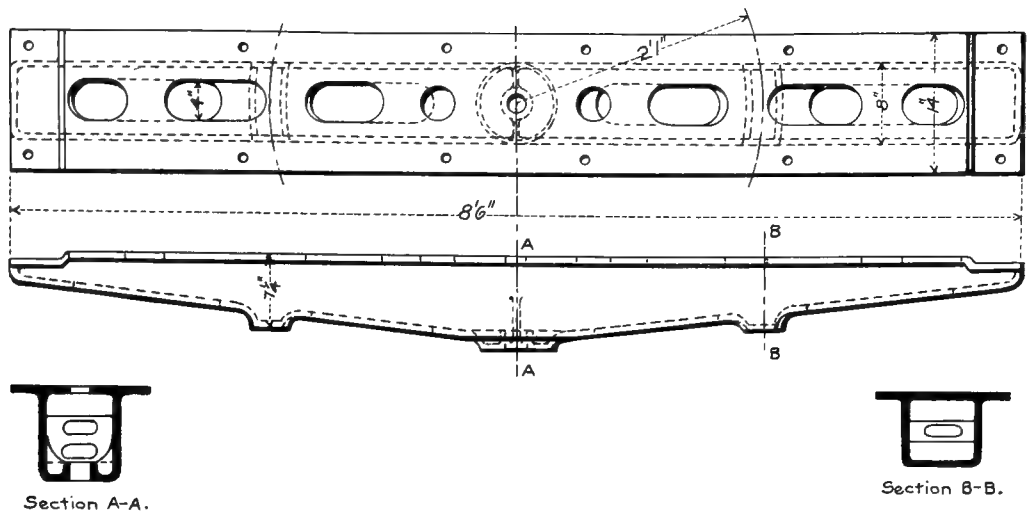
Cast Steel Box Section Body Bolster. American Steel Foundries.
